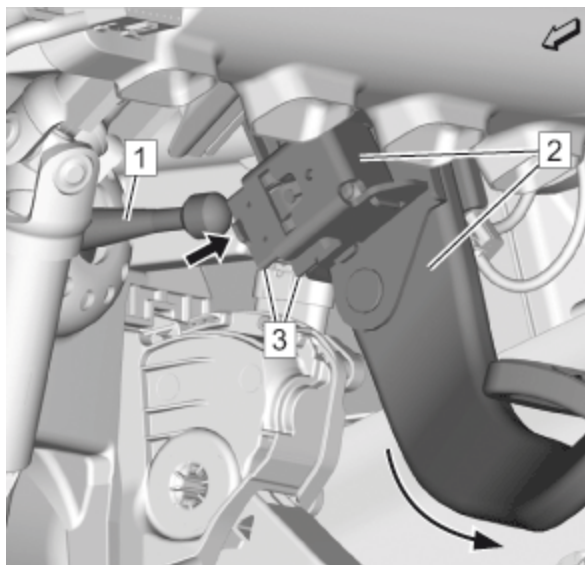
Brake Pedal Push Rod And Brake Pedal
